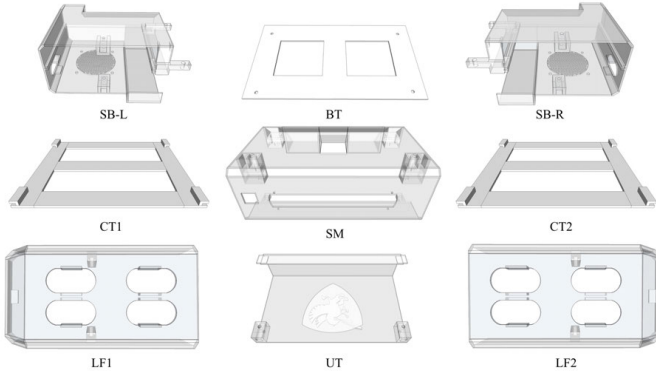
iChair enclosure (ENC) parts, designed with 3D printing and robotic assembly in mind. See Table I for a description of the labels.
